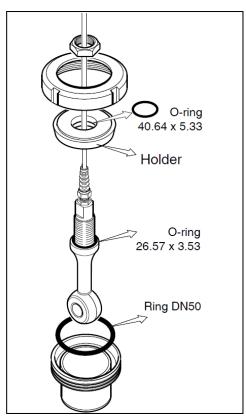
ISC40 sensor in weld-in sub-assembly ISC40FS-SCWN
